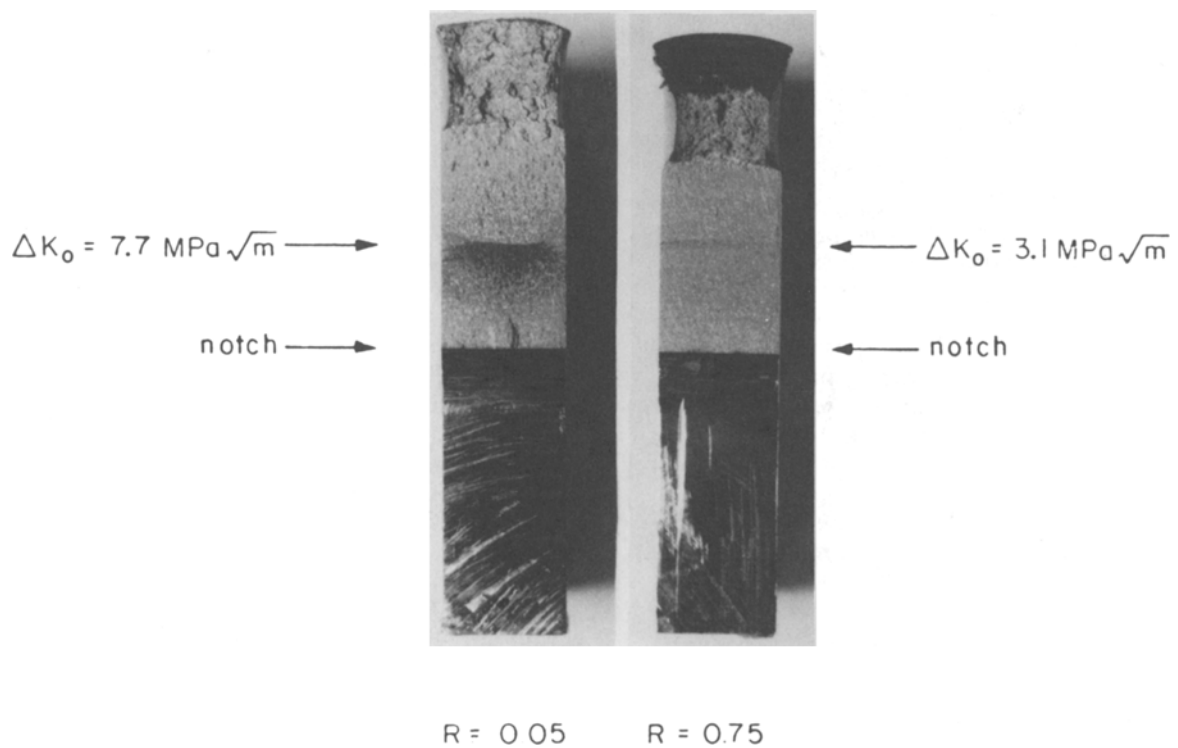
Bands of corrosion deposits visible on near-threshold fatigue fracture surfaces of SA542-3 tested in moist air at (a) $R = 0.05$ and (b) $R = 0.75$.
